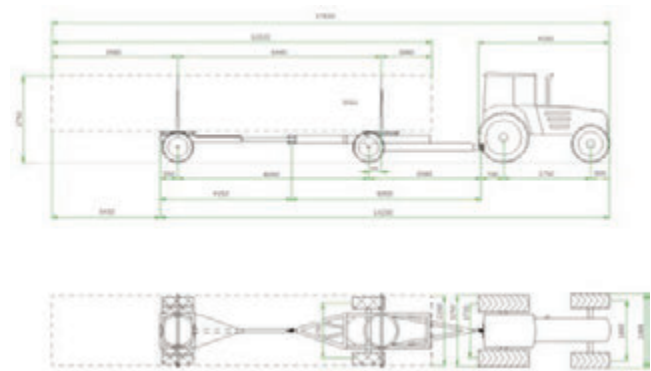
Layout and main dimensions (mm) of the double steering forest trailer prototype.
